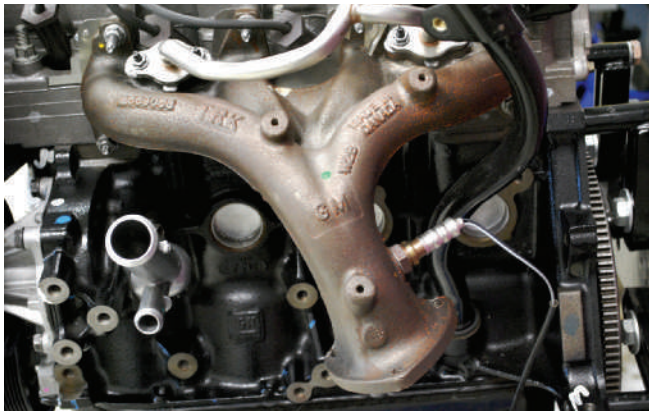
A cast iron exhaust manifold for a four-cylinder engine.
